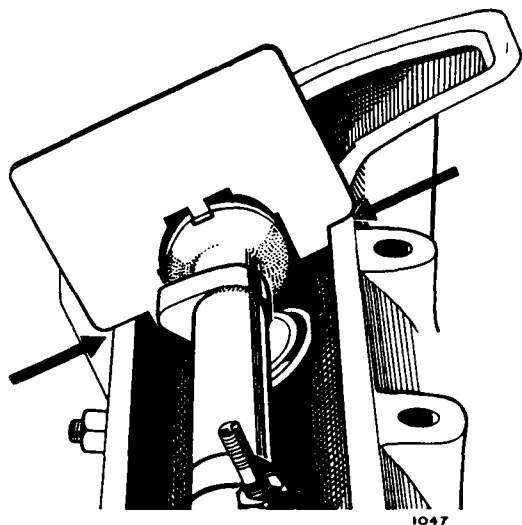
The valve timing gauge in position. Ensure that the gauge is seated at the points indicated by the arrows.
